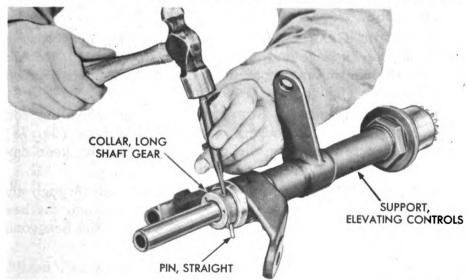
Removing the Pin from the Long Shaft Gear Collar
